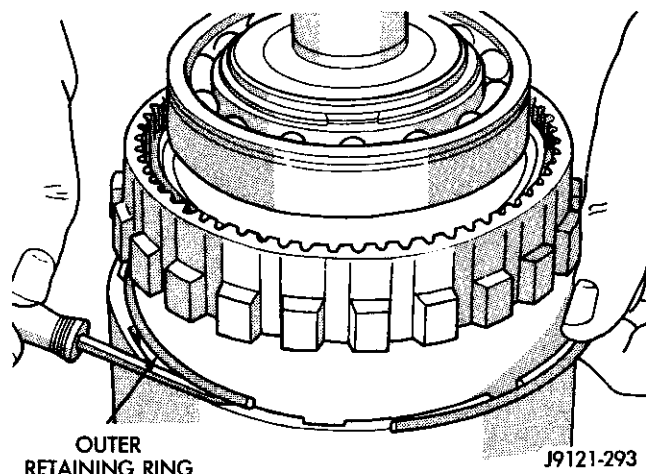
Clutch Drum Outer Retaining Ring Removal
